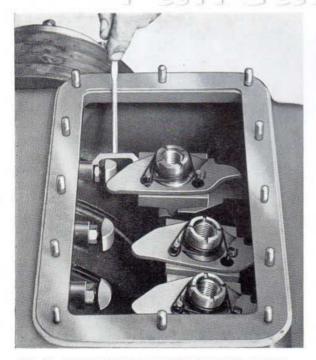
APPLICATION OF TOGGLE SETTING GAUGE.
